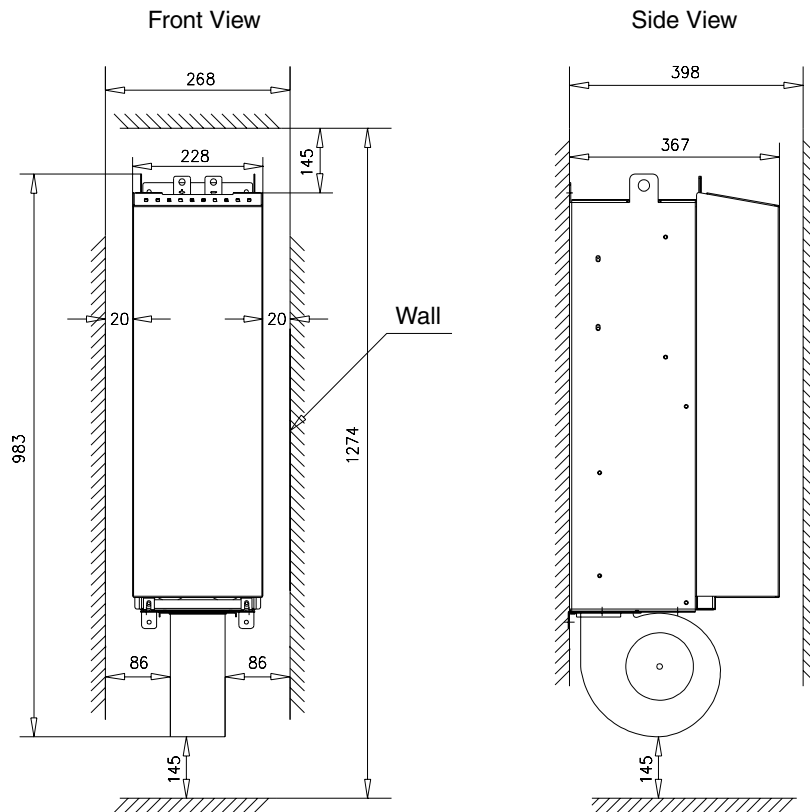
Frame R6i and R7i module dimensions and clearances.
